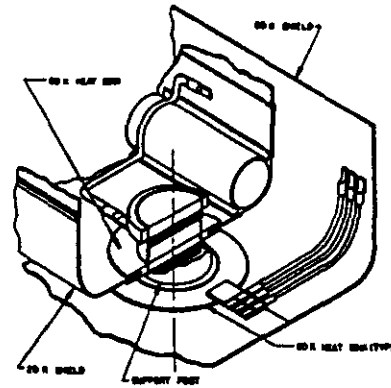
Heat intercept linkage between support post and thermal shields. Large area cables with welded connections provide a low ΔT across the connection.
